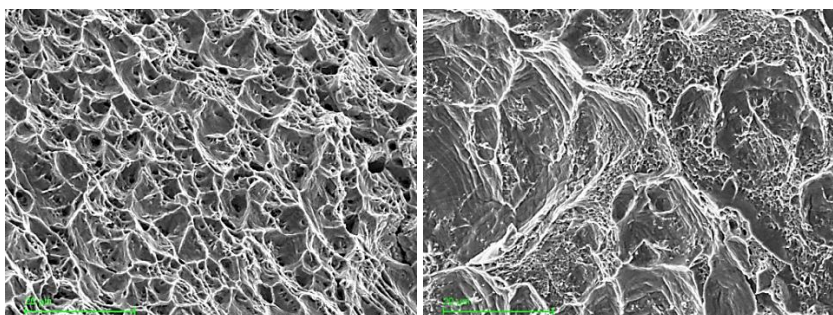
SEM images showing the ductile fracture surface found from the fracture surfaces of the Alloy 52 weld metal specimens.
